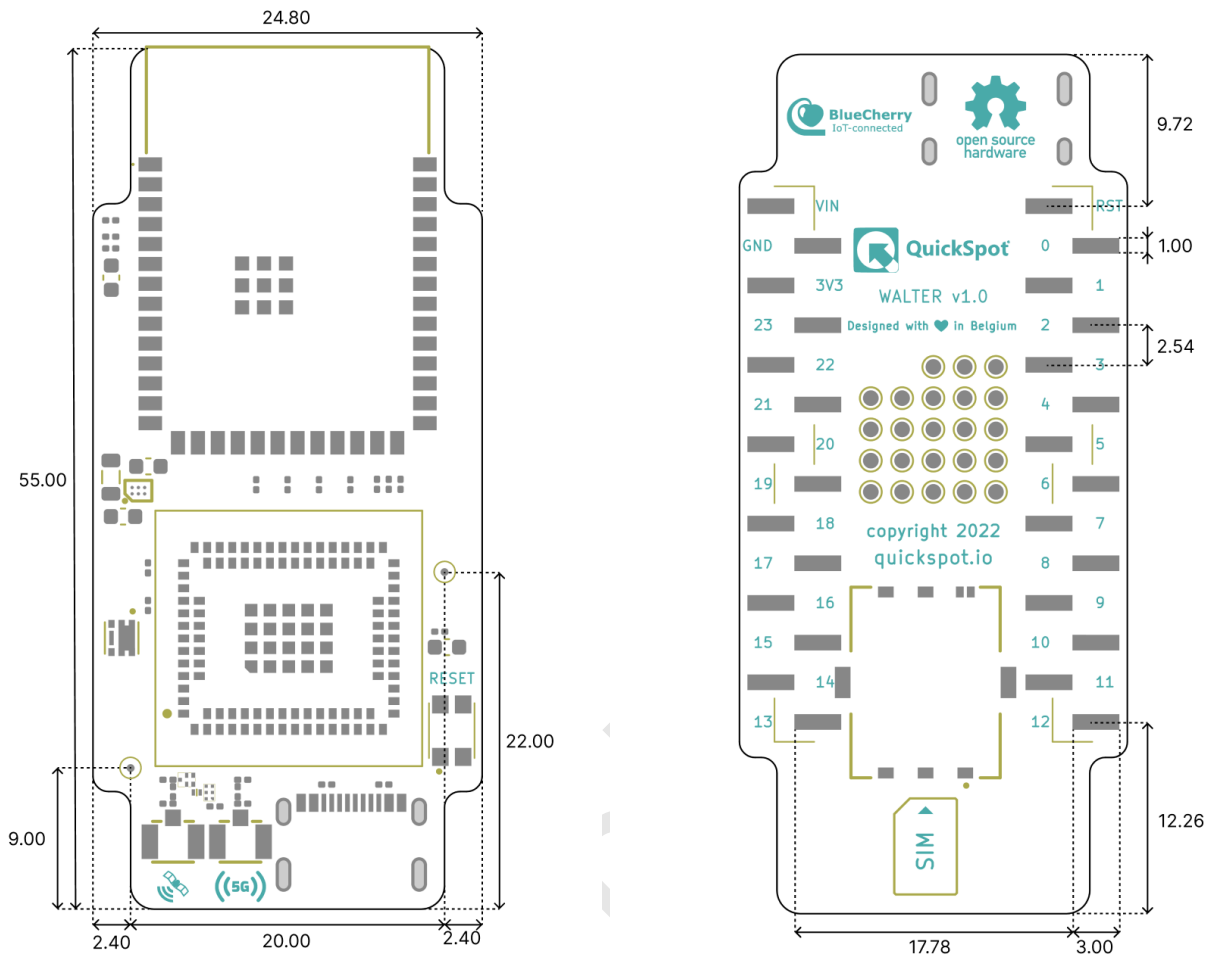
Mechanical Drawing Front and Rear View - Unit in mm
